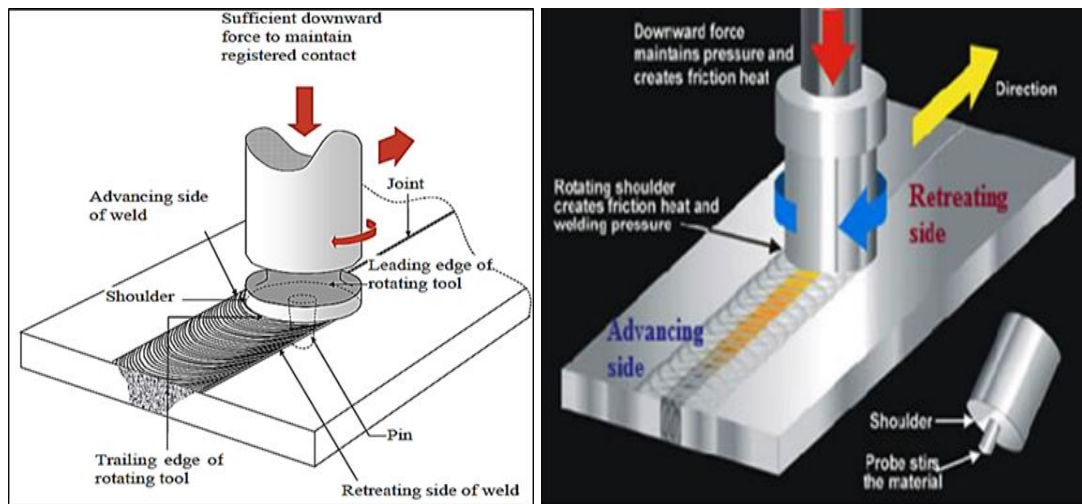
Schematic drawing for friction stir welding process
